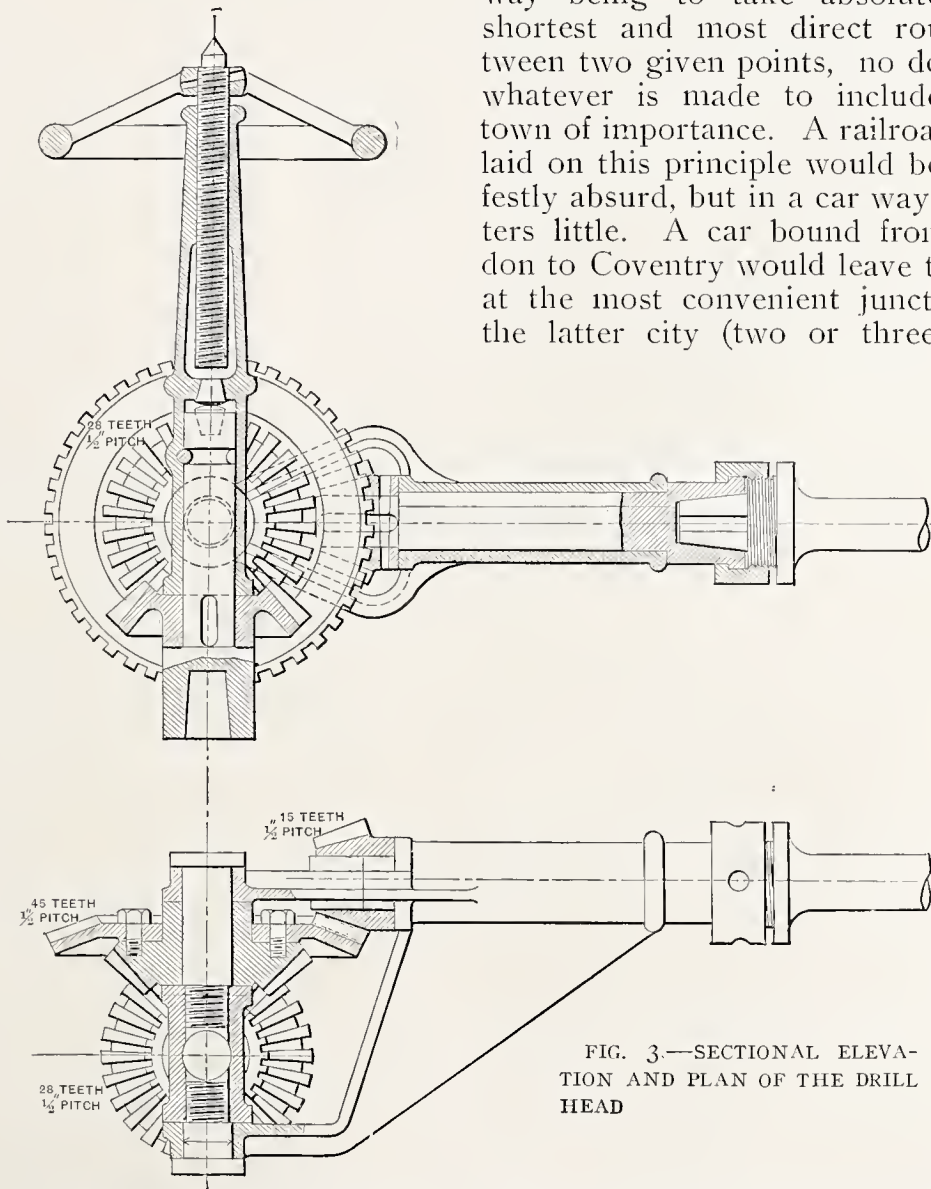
SECTIONAL ELEVATION AND PLAN OF THE DRILL HEAD
